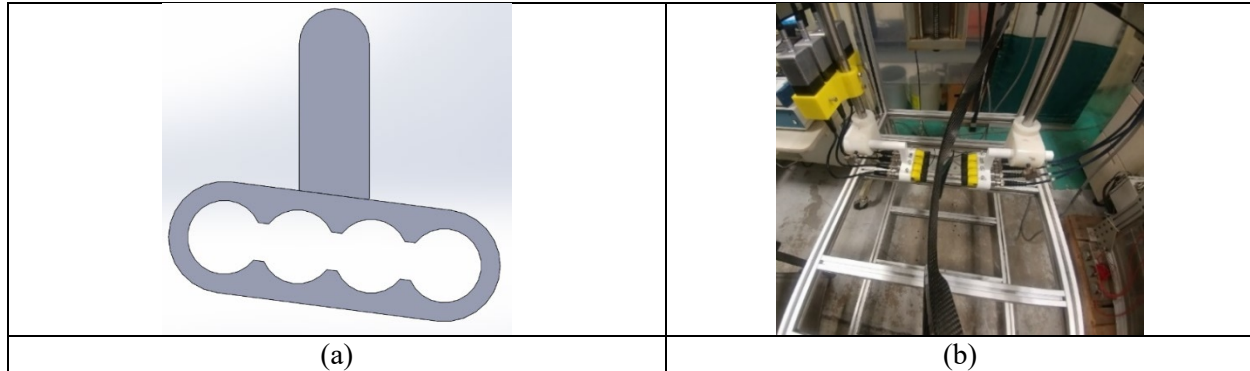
Linear array fixtures: (a) CAD model, front view; (b) 3D printed parts with installed CF-200 ACUT sensors and focusing cones.
